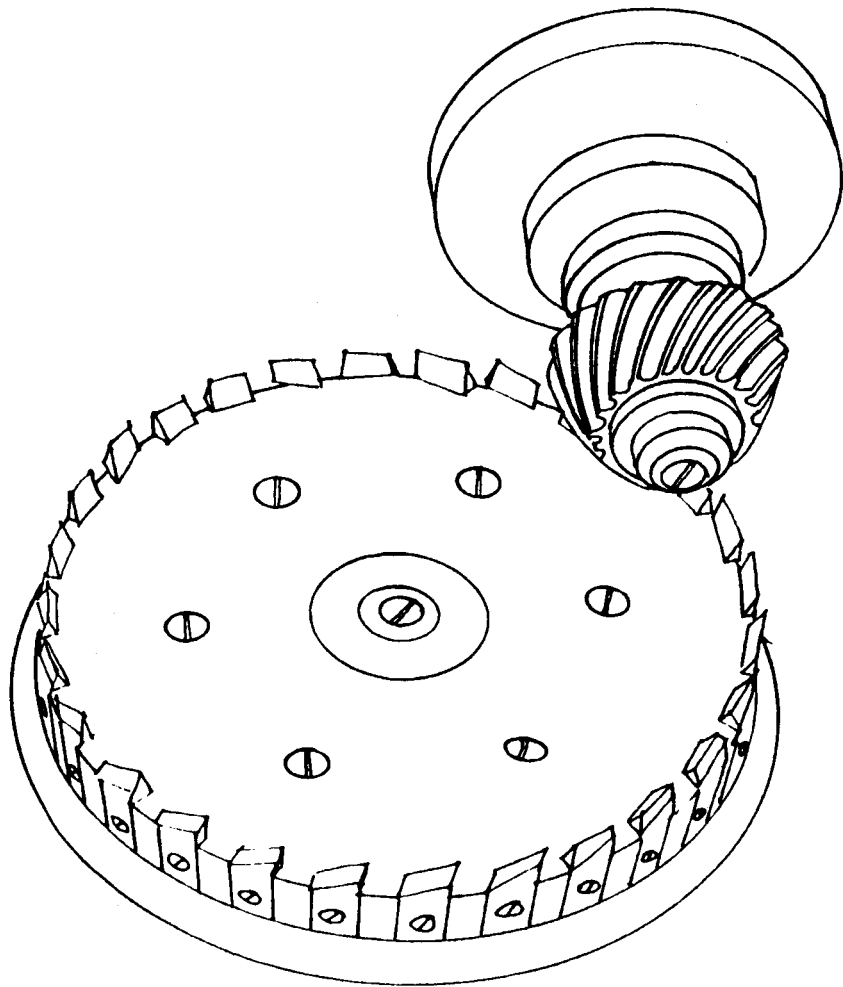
Spiral Bevel Pinion Being Cut on Generator
